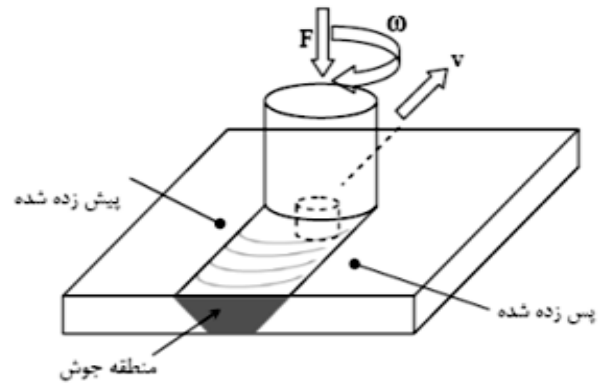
Schematic drawing of friction stir welding [5]
